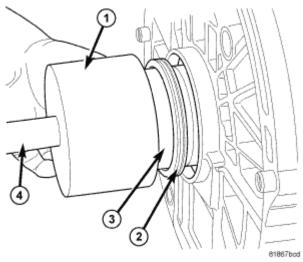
REAR MAIN INSTALLATION Courtesy of CHRYSLER LLC
